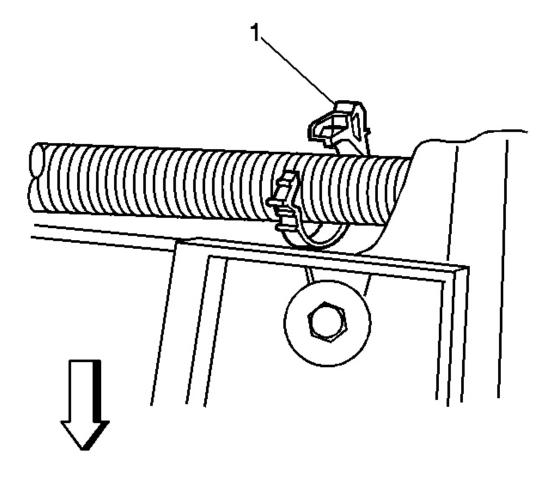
Identifying Headlamp Wire Harness Retaining Clip Courtesy of GENERAL MOTORS CORP.
